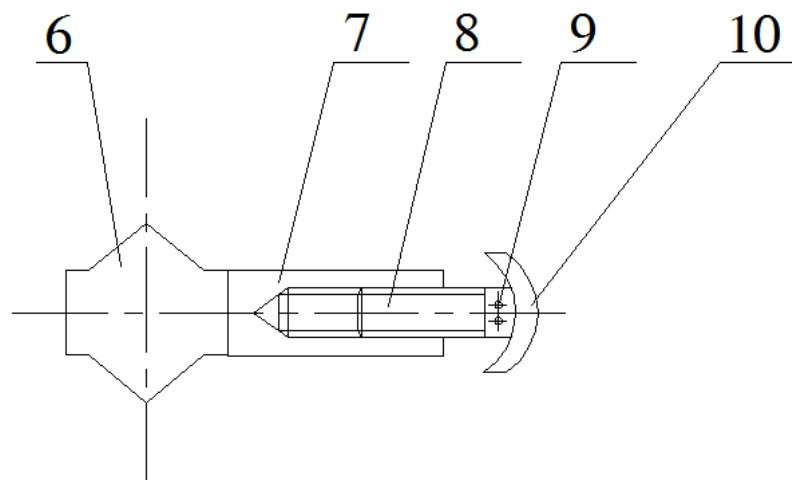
structure graphic drawing of hand & box seedcase cutter magnify view
